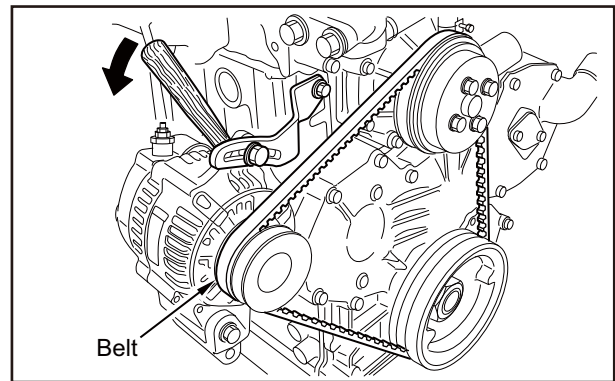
Belt and belt tension - Inspect and Adjust
